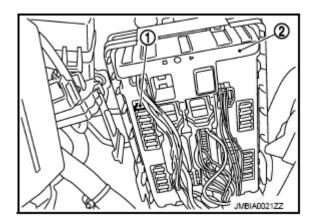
Identifying Fuel Pump Fuse And IPDM E/R
